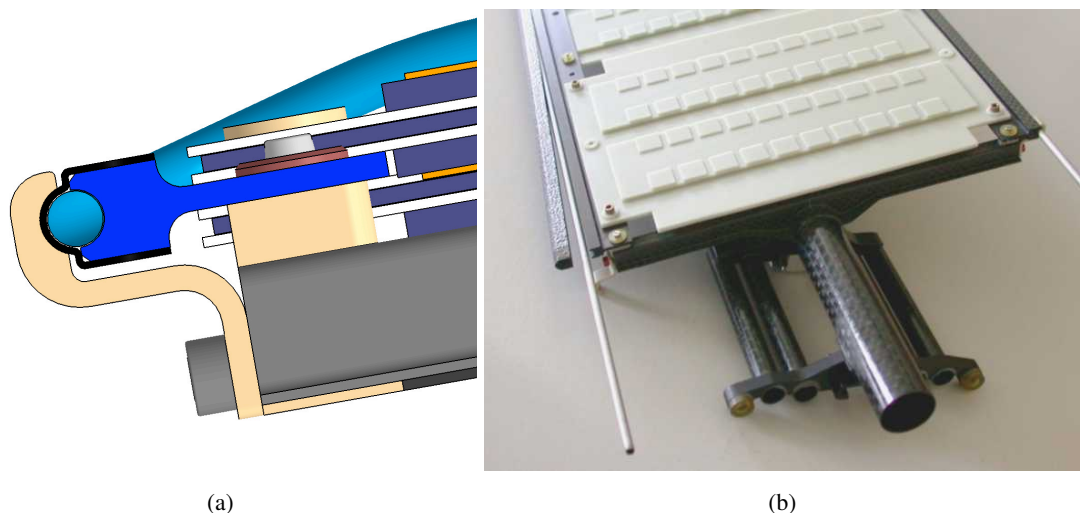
(a) A simplified cross section of the SM cooling plate together with the cooling pipe that is kept in contact with the plate by the facing plate and thermally conductive grease. (b) The cooling plate (in this case aluminium) mounted on a fully assembled prototype LS. A dummy mechanical DSM module is attached to the cooling pipe.
